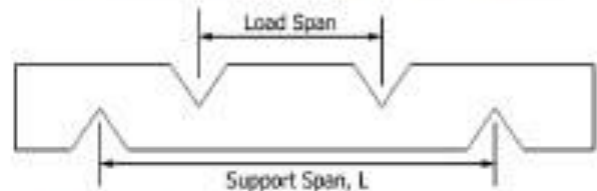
Fixture Used to Align Loading Noses and Supports
